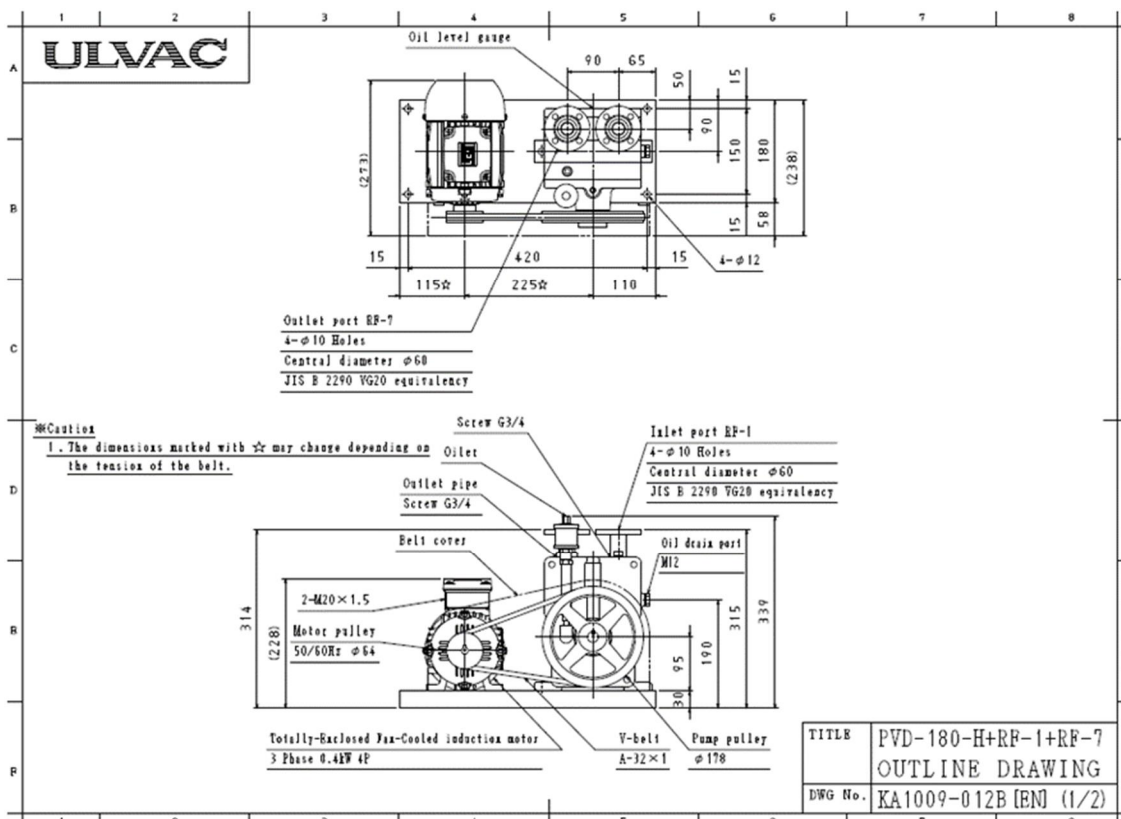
Dimensional drawing PVD-180-H+RF-1+RF-7
